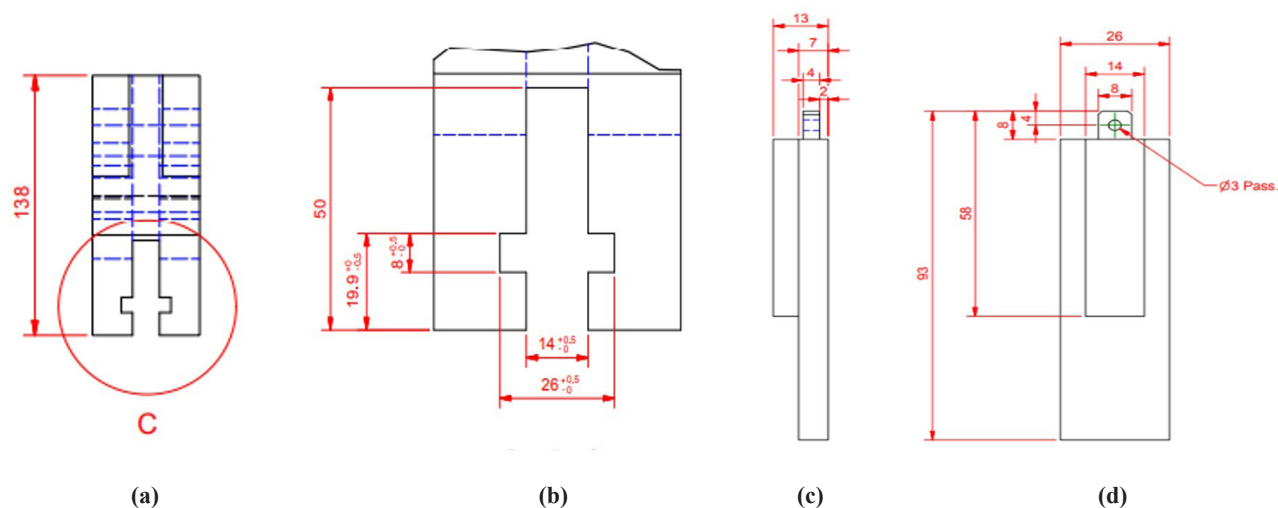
Details of the lock (in millimeters): (a) upper view; (b) dimensions of upper view; (c) side view of lock opening system; (d) lock front view.
